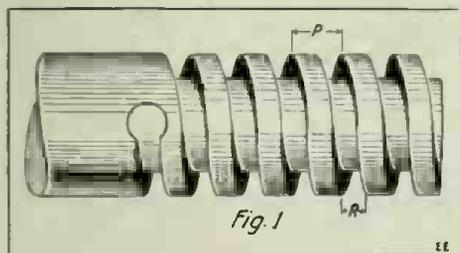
A Neat Way of Finishing Off a Square Thread As Cut in the Lathe, and Which Method of Ending the Thread Is Carried Out By Drilling a Small Hole Radially Into the Work, at the End of the Thread. This Hole Is Preferably Drilled After Making the First Trial Cut, and It Should Be Slightly Larger Than the Width of the Tool; Also Its Depth Should Be a Little Greater Than the Depth of the Thread.
